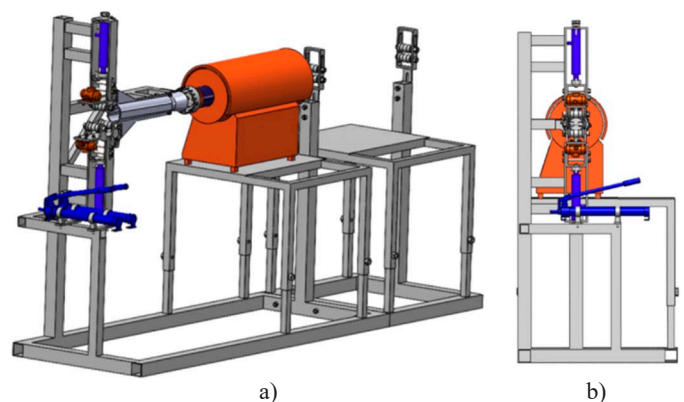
Laboratory kit for gripping and guiding aluminium profiles: a) side view, b) view from the profile exit side
